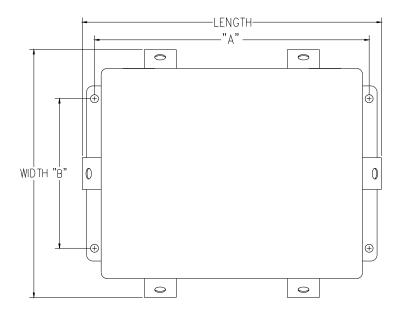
72343, BA72343, CA72343 Six-unit explosion proof housing
